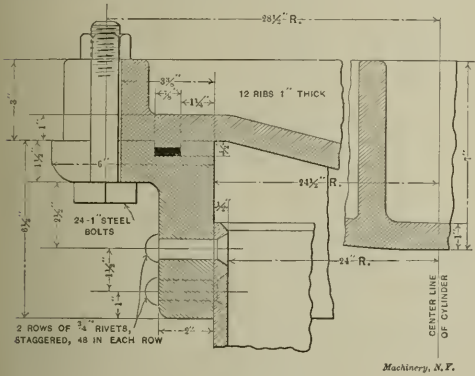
Original Design of Mouthpiece Ring and Cover.
